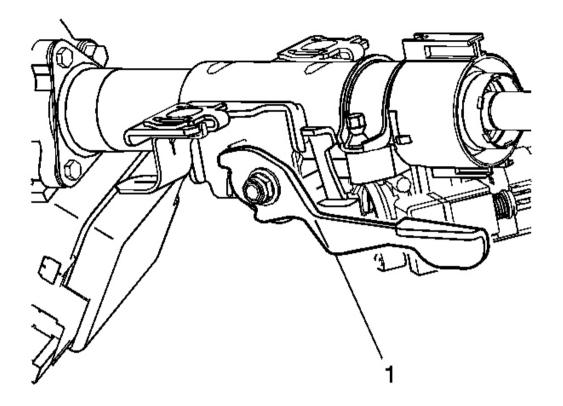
Release & Secure Rake/Tilt Lever Courtesy of GENERAL MOTORS CORP.
